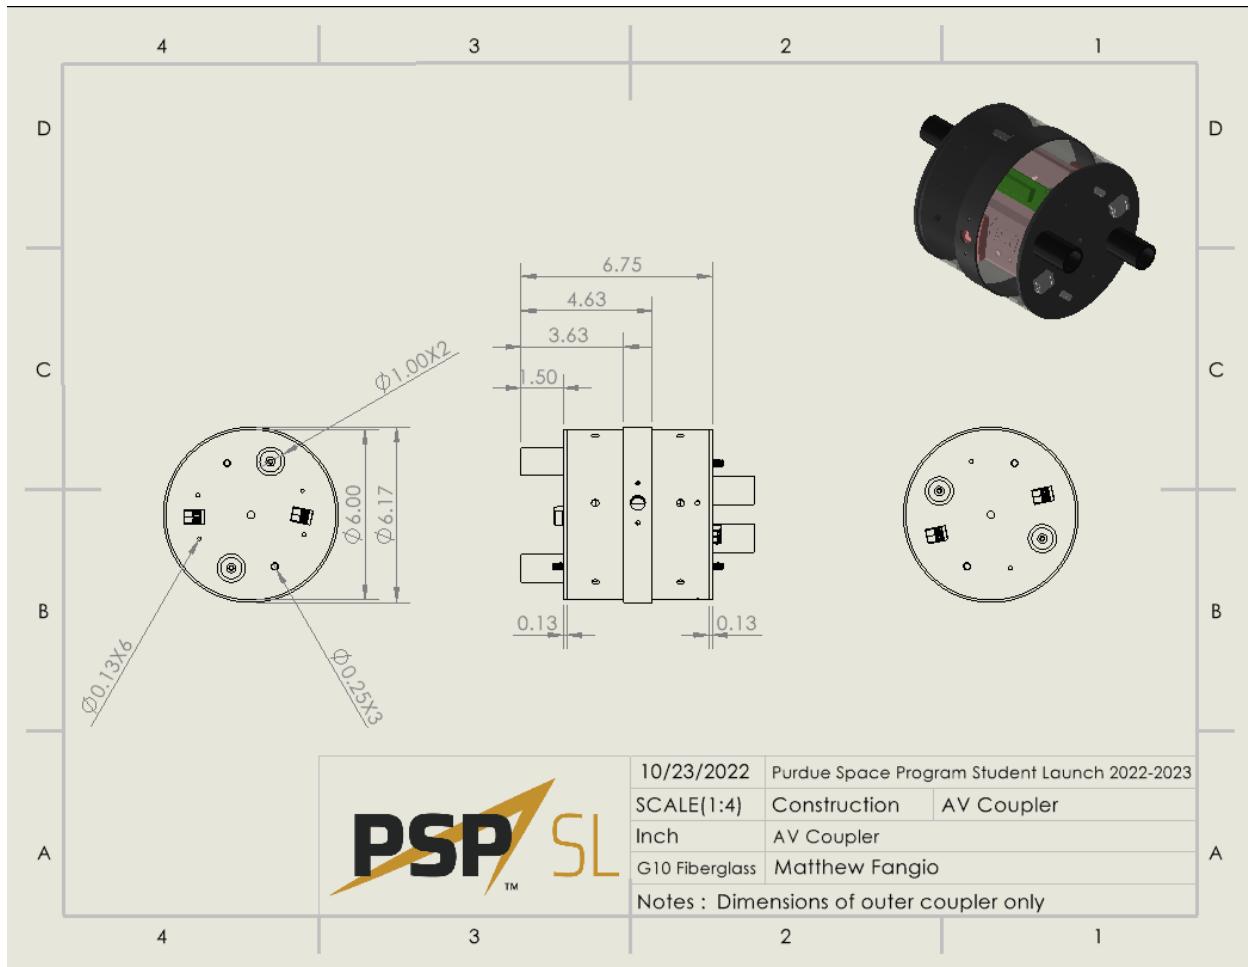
Technical Drawing for Avionics Bay
